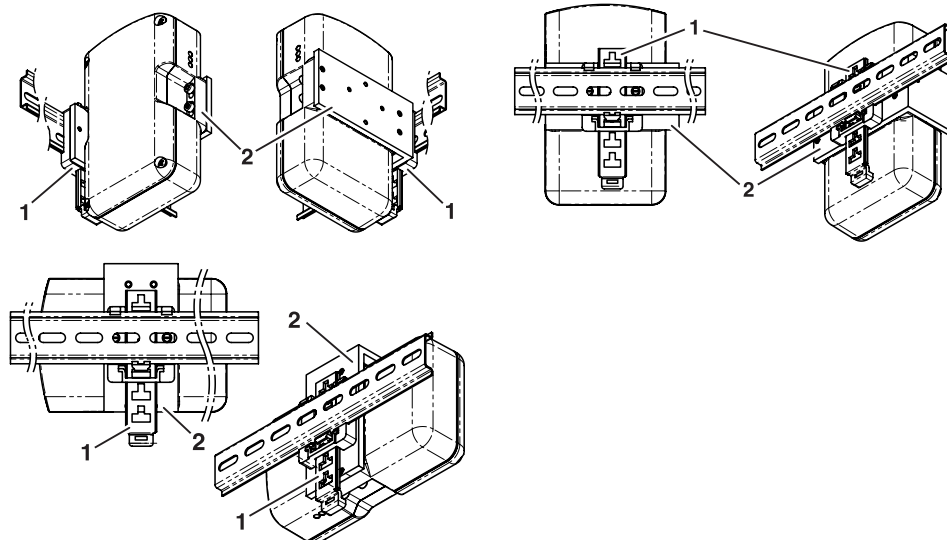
Mounting using rail holder BIS Z-HW-001 (accessory)
